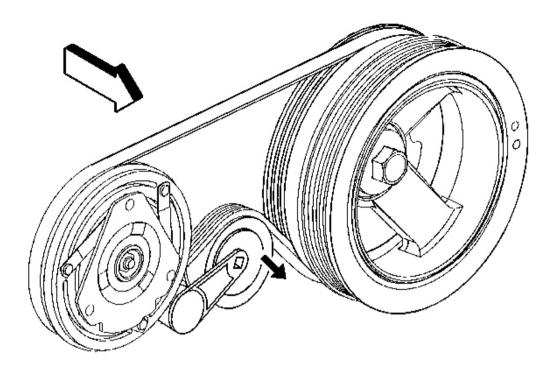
A/C Belt Tensioner Courtesy of GENERAL MOTORS CORP.
